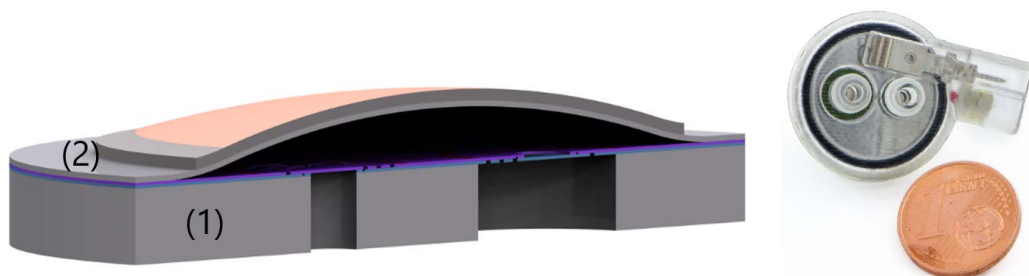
RAPA micropump made up of stacked steel foils with passive check valves (blue and purple layers) bonded by laser welding onto the base plate (1). The actuation is realized by a piezoelectric ceramic glued on top steel foil (2).
